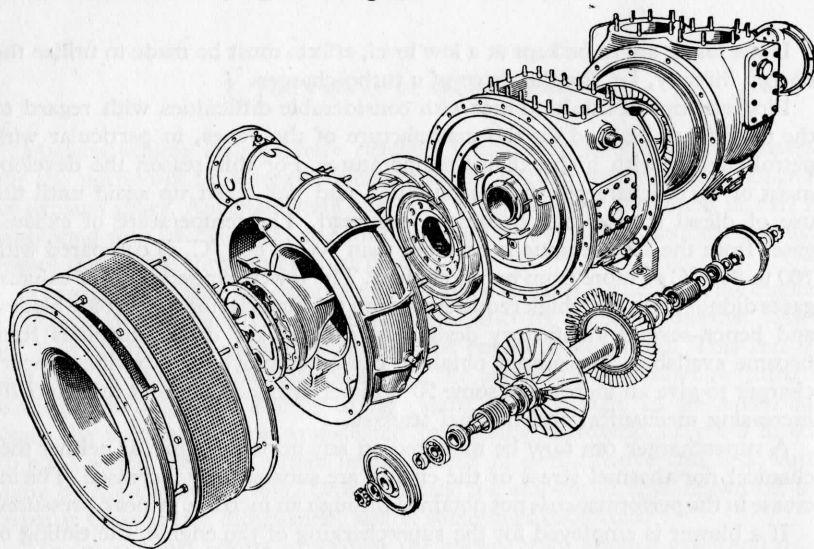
Exhaust gas turbo-compressor used as a supercharger in compression-ignition engines.
